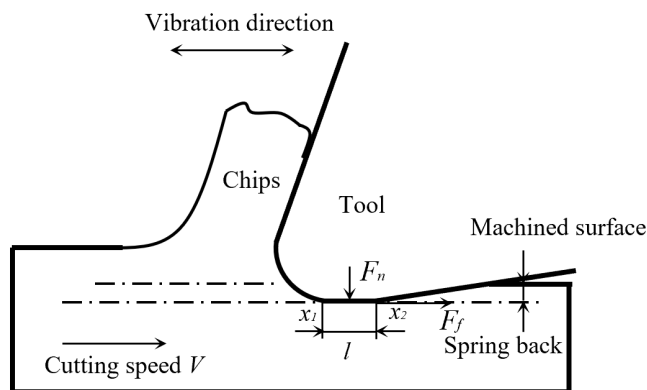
Layout of contact length between the workpiece and the tool in vibration assisted micro milling
